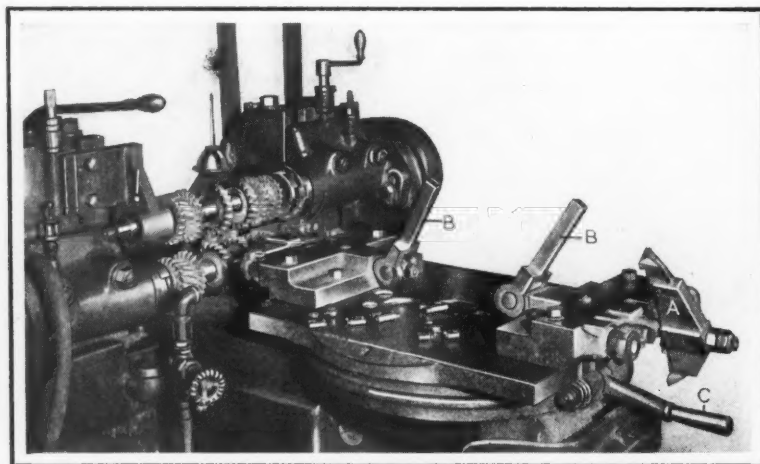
Employing Sixteen Milling Cutters in an Automatic Milling Operation on Valve-sleeve Connecting-rods
